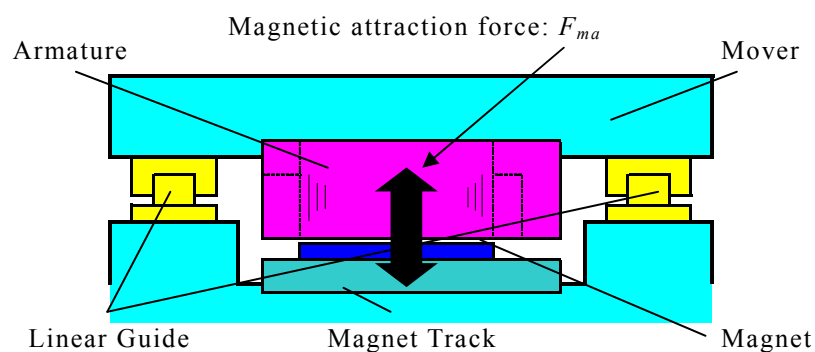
Illustrate drawing for magnetic attraction of F type
